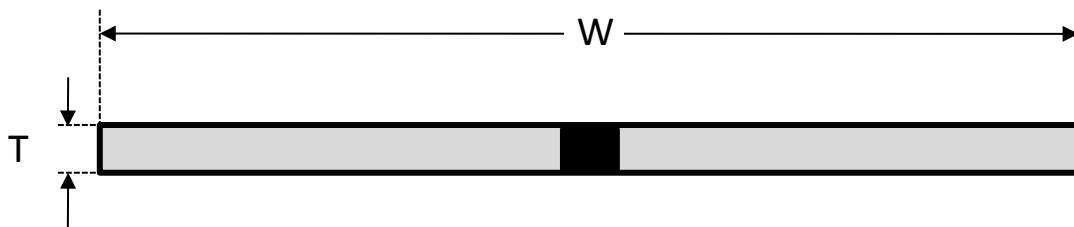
Cross-sectional view of AFGROW internal through crack at a hole model used for the ASTM E 647 specimens, with through crack in center of model
